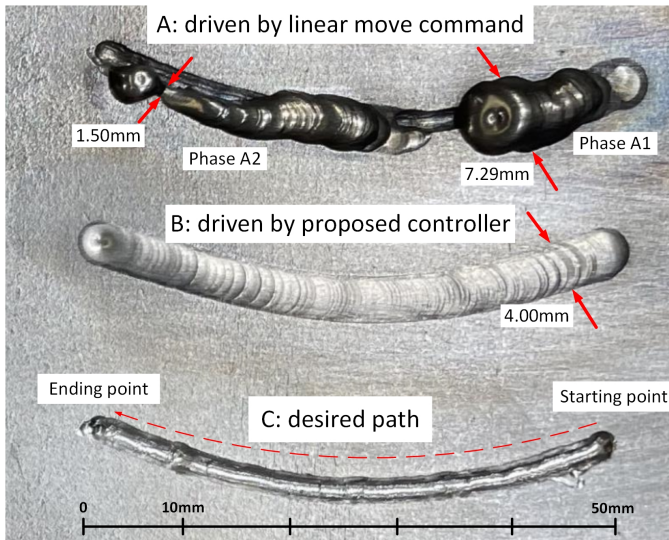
TIG welding results comparison: (A) welding based on linear move control; (B) welding based on the proposed control scheme; (C) desired path created for case A and B
